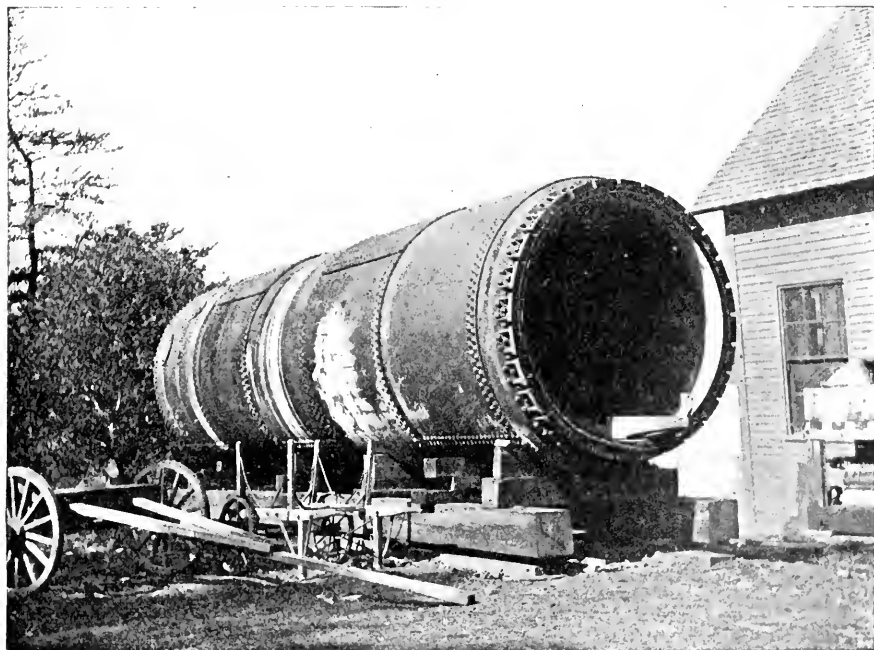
THE COOKER AFTER THE EXPLOSION.
